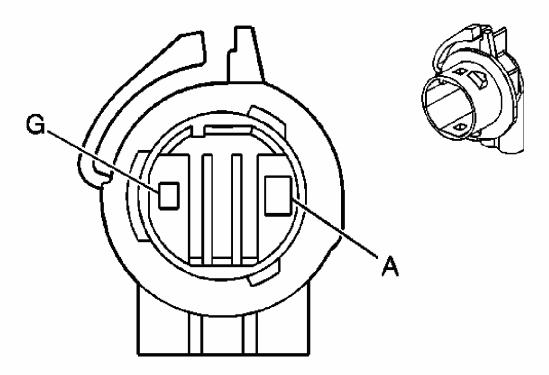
Cornering Lamp - LF (TUH) Connector End View Courtesy of GENERAL MOTORS CORP.
